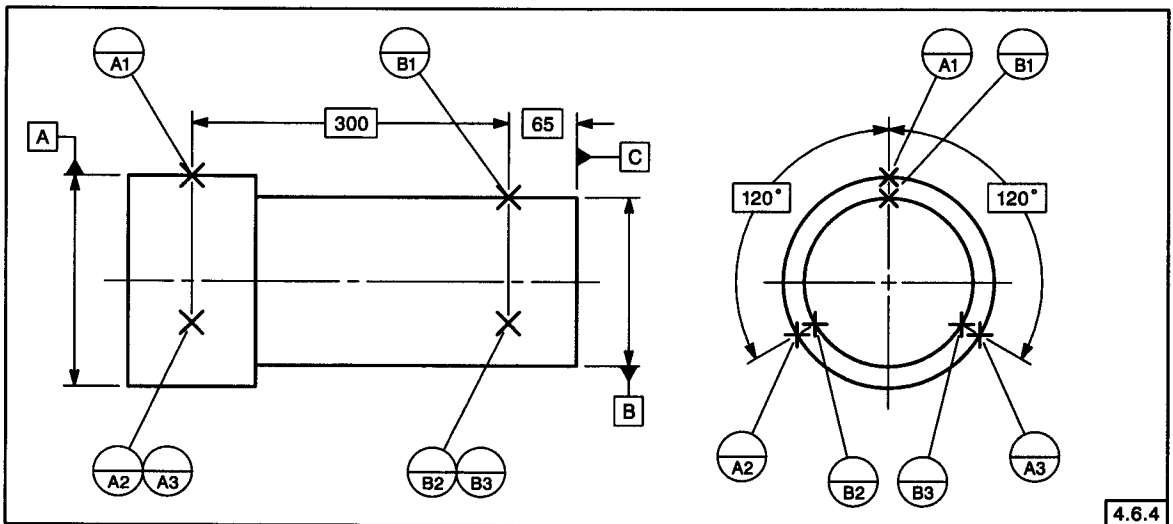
PRIMARY DATUM AXIS ESTABLISHED BY DATUM TARGET POINTS ON TWO CYLINDRICAL FEATURES
